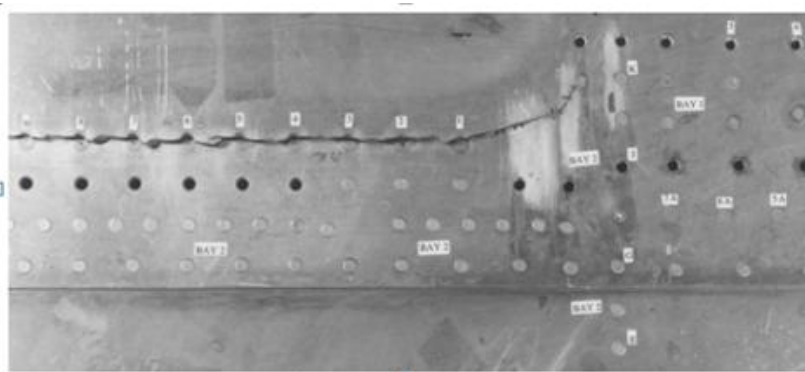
Larger crack formed by the link-up of fatigue cracks at adjacent rivets
